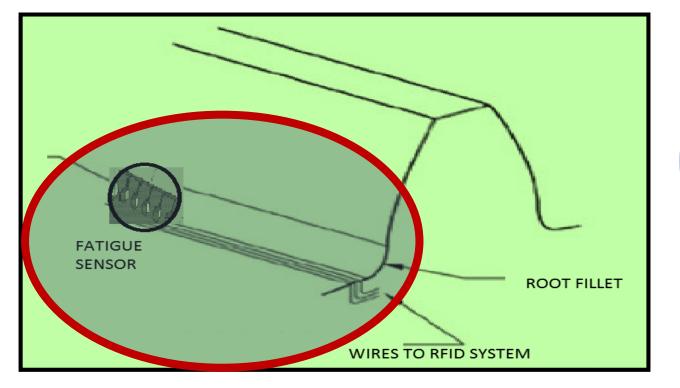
Fatique Crack in Gear Tooth Root Fillet.
